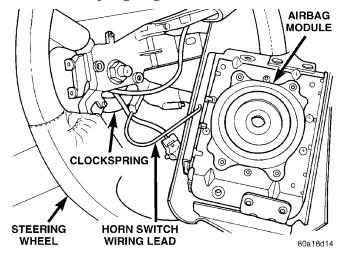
Clock Spring To Horn Switch Wiring Connection
